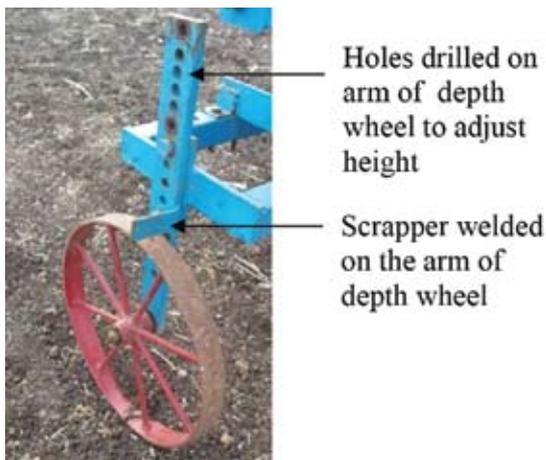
Holes drilled and scrapper welded on the brace/arm of ground wheel
